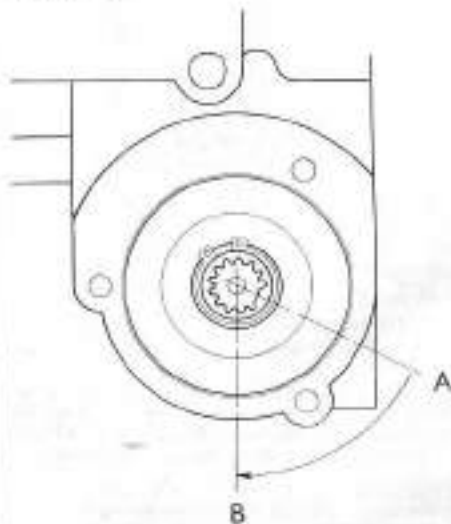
View showing timing of 3-cylinder diesel injection pump drive gear to camshaft; refer to paragraph 112.
